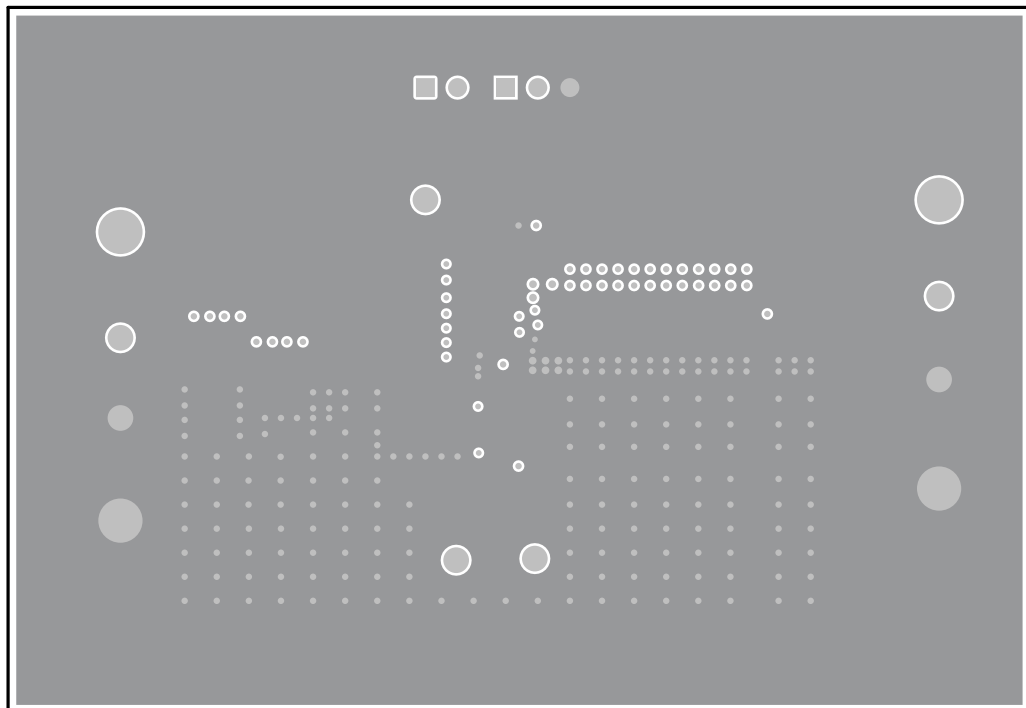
TPS61288EVM-064 Inner Layer1 Layout
